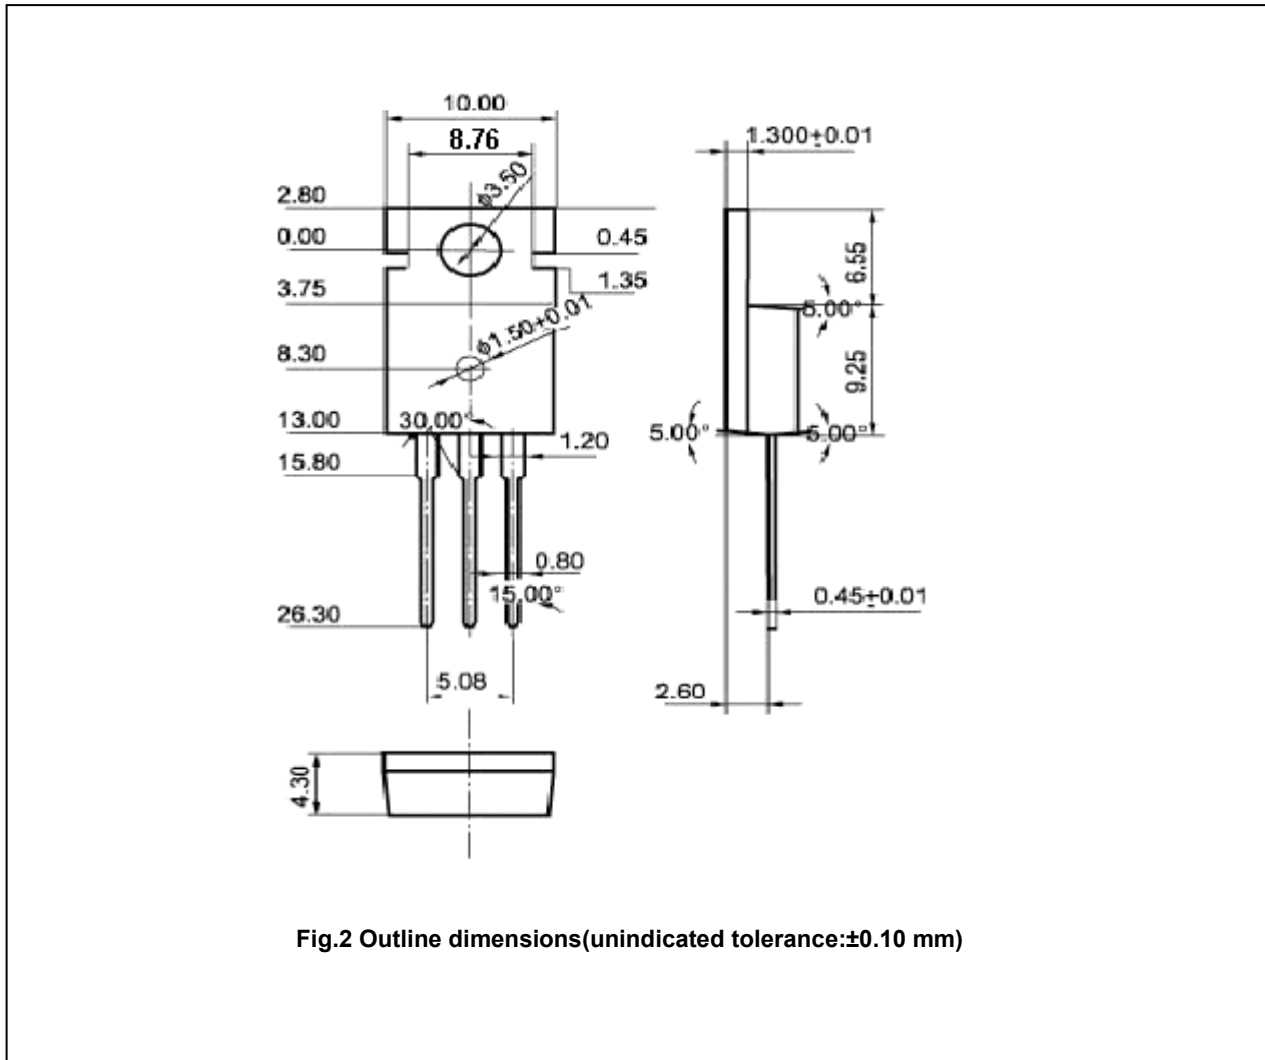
Outline dimensions(unindicated tolerance:±0.10 mm)
